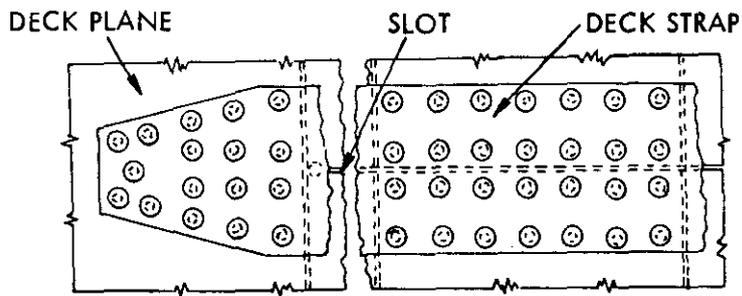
Typical Geometry of Riveted Crack Arrester
